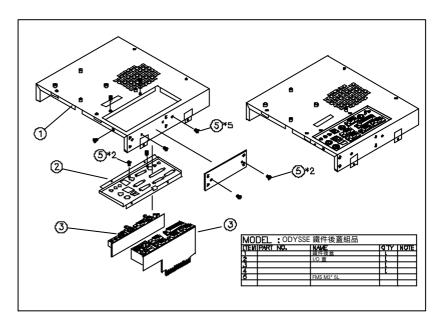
ODYSSE BACK MODULE ASSEMBLY
